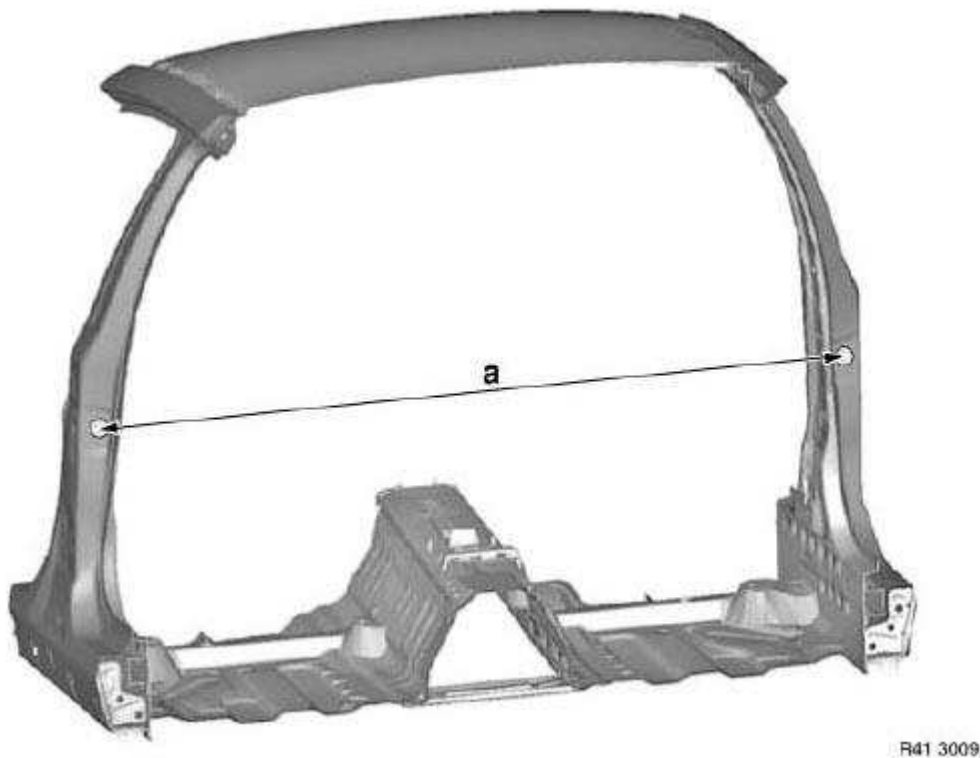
Frame Alignment Control Dimensions - View, B-pillar
